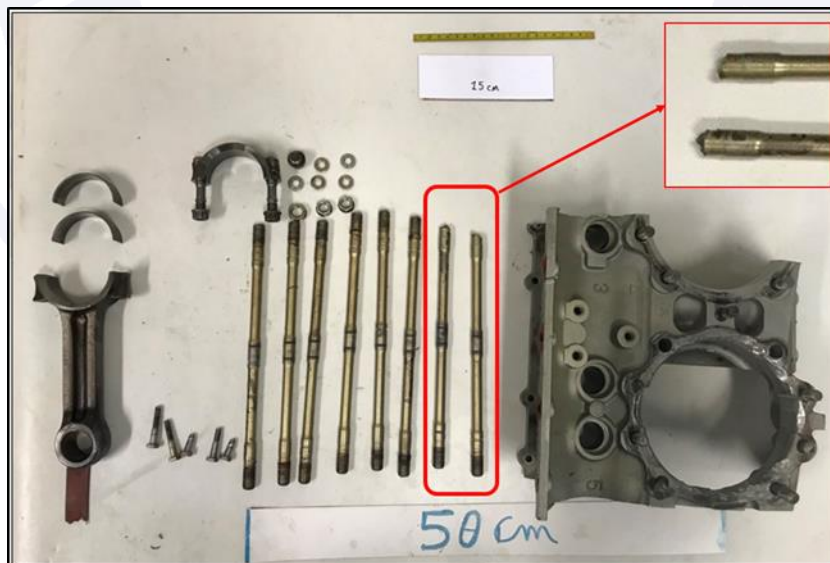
Parts of the right engine during analysis, highlighting two fractured crankcase through-bolts.
